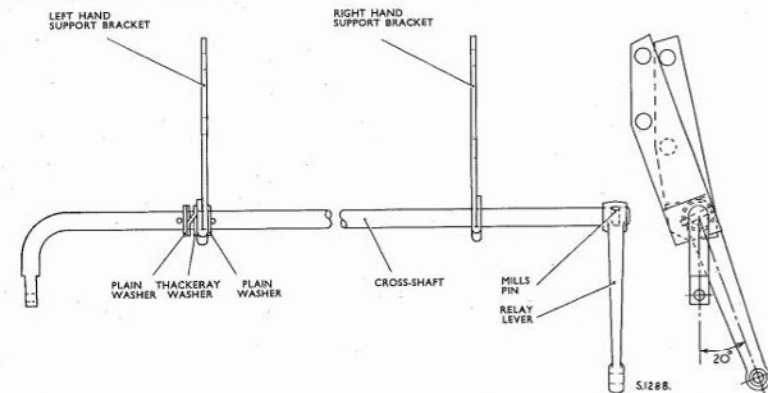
Accelerator cross-shaft arrangement, showing the angular disposition of the relay levers (L.H.D. Models)
